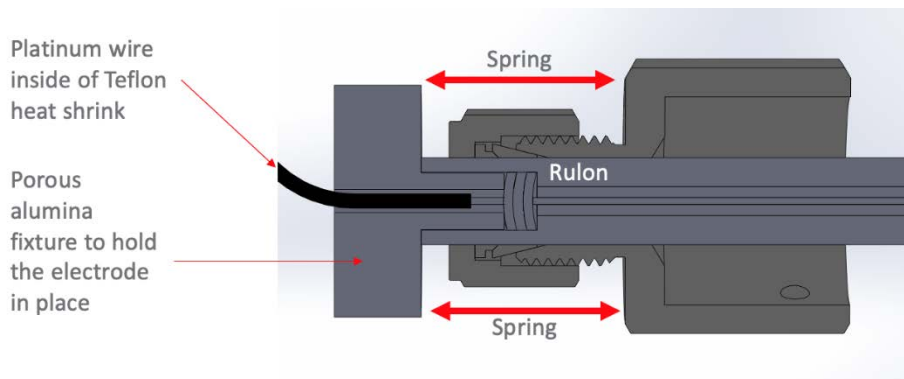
Springs hold the porous alumina against the Rulon sample holder
